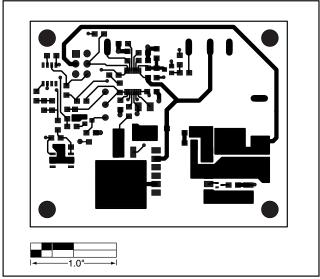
MAX5003 EV Kit PC Board Layout—Component Side
